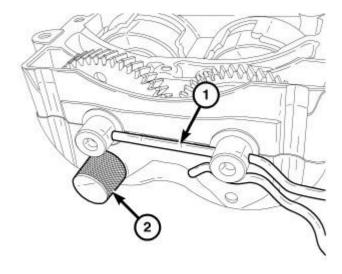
BALANCE SHAFT TIMING TOOL Courtesy of CHRYSLER LLC
